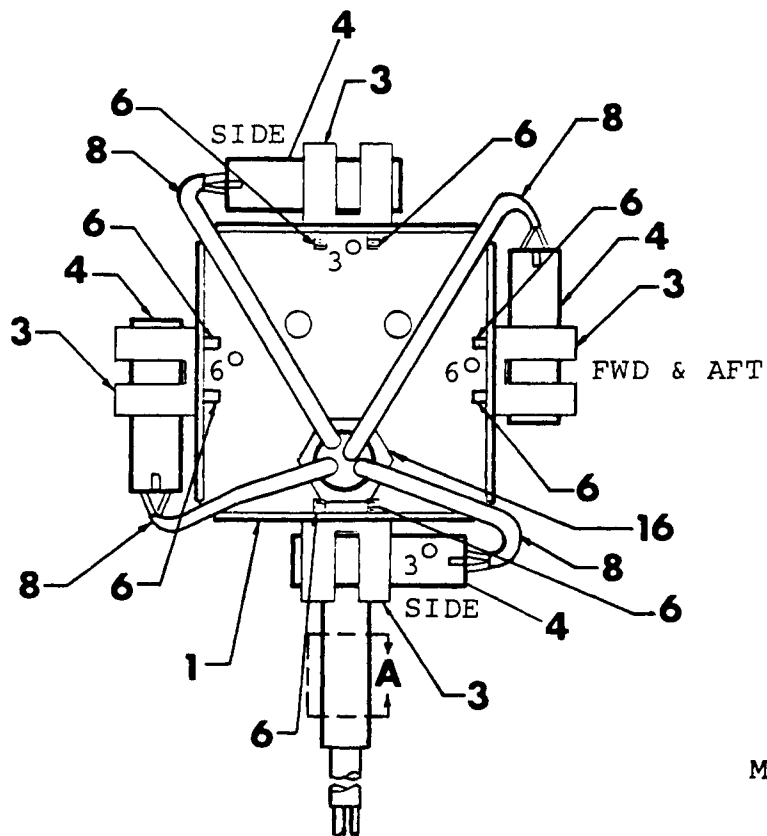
H - MANIFOLD PACKAGE-WITH OUTRIGGER
